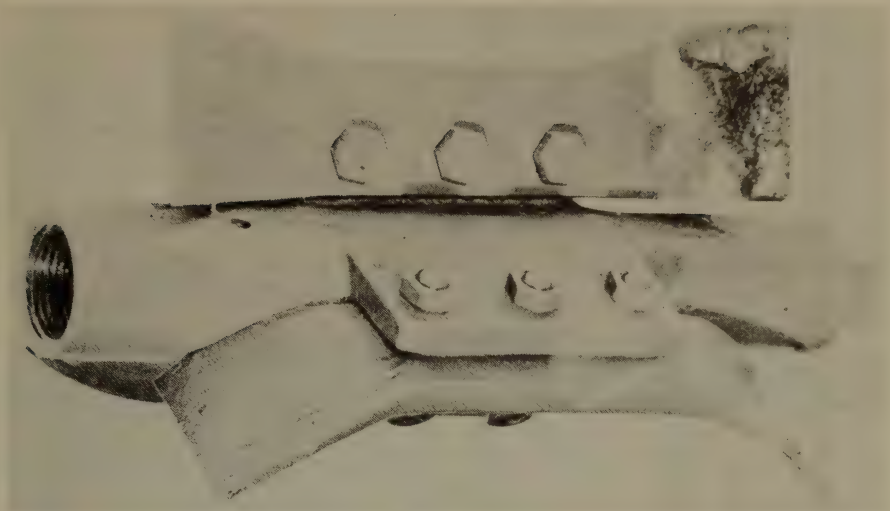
• Three-Bladed Earth Reamer. (*Courtesy, Melfred Welding and Mfg., Inc.*)
